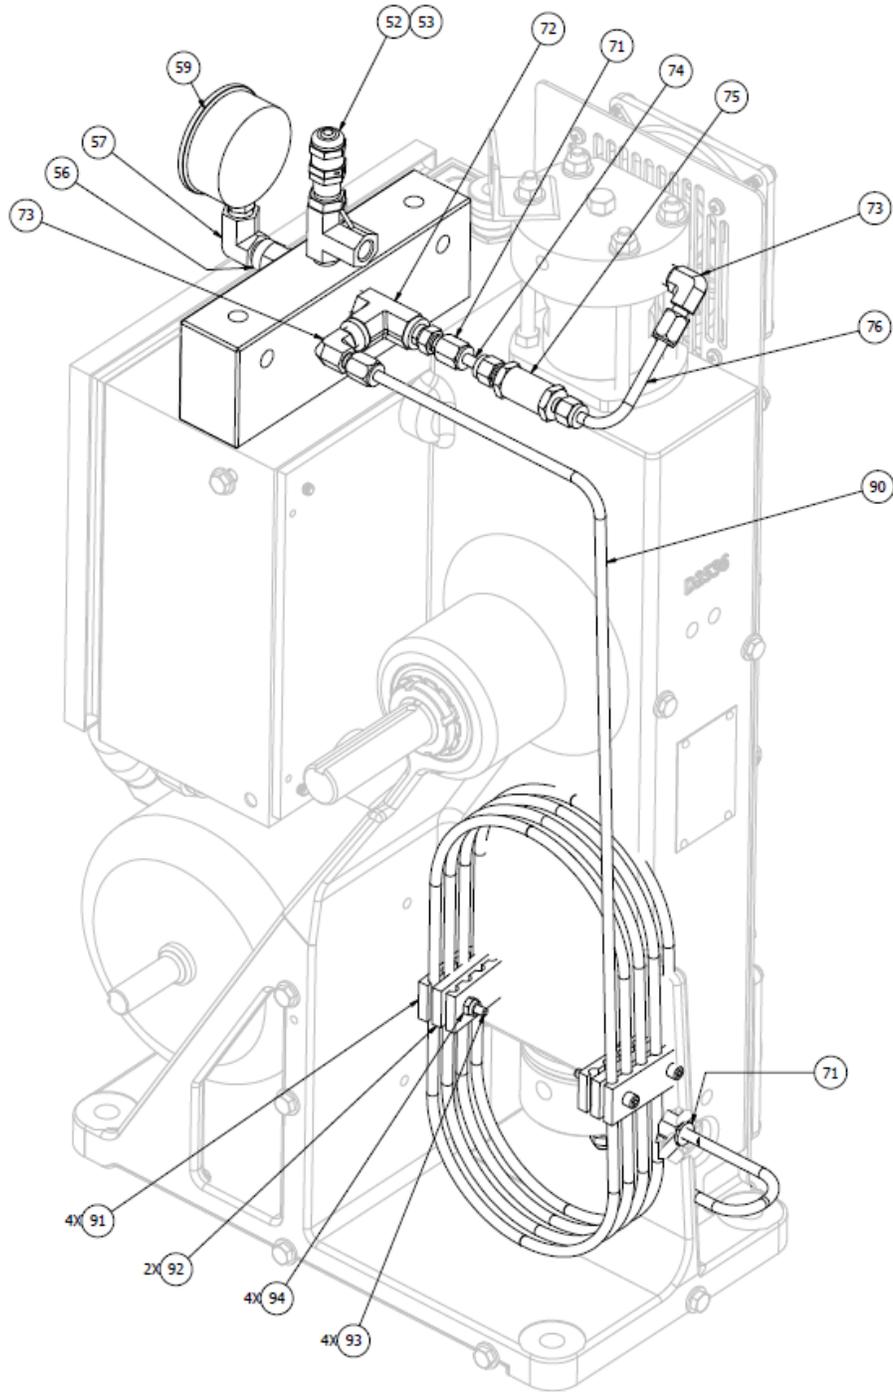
INTERSTAGE PLUMBING DETAIL
